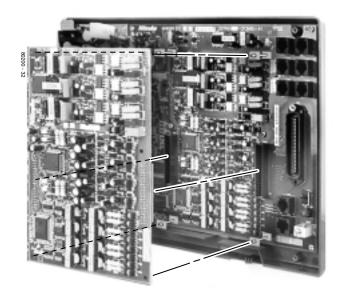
INSTALLING THE EXPANSION BOARD 1-12
